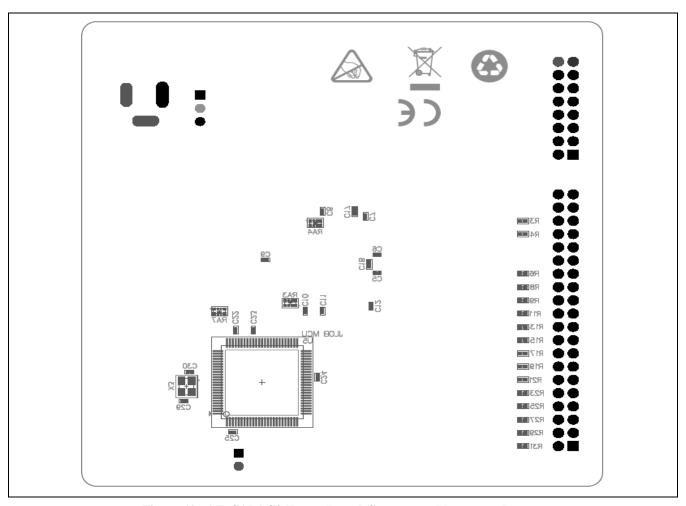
AE-CAP1-S3 Target Board Component Placement, Bottom
